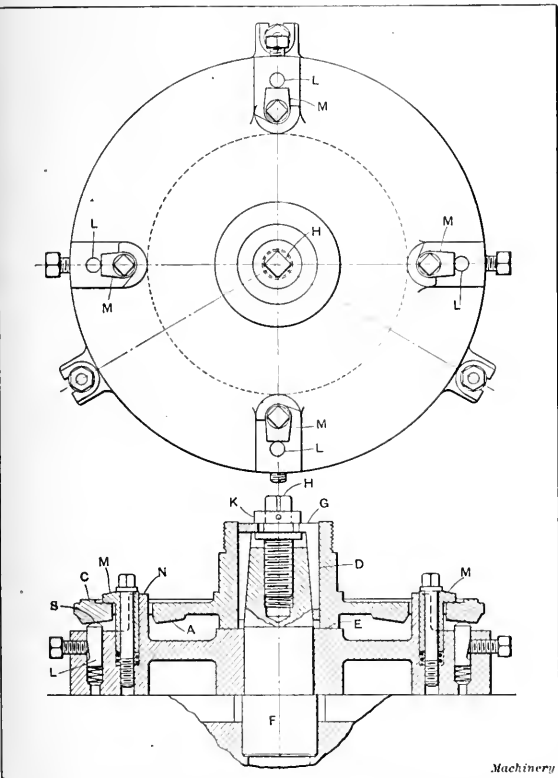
Vertical Boring Mill Fixture for Special Design of Bevel Gear
